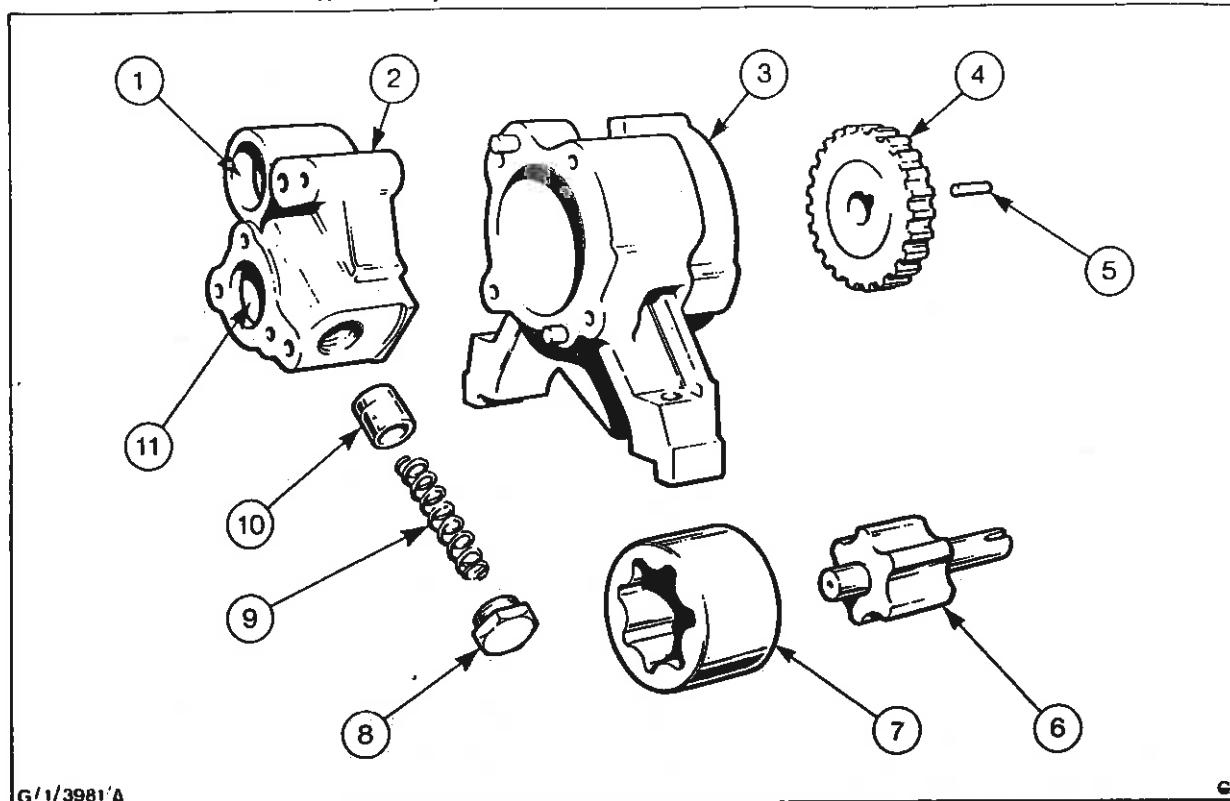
Exploded View of Holborn Eaton Type Oil pump
